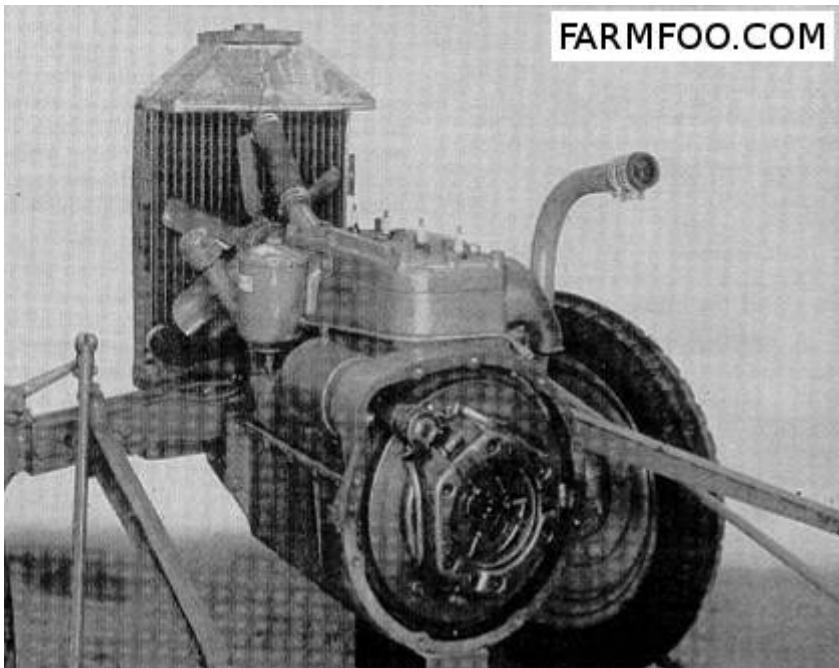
Front assembly separated from transmission on models 2N-8N-9N.
